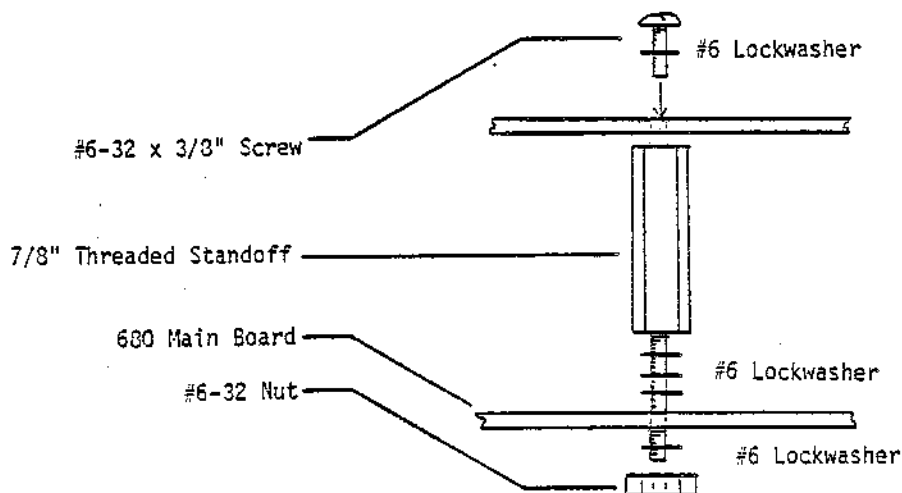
Installation of Threaded Standoffs Onto 680b Main Board
